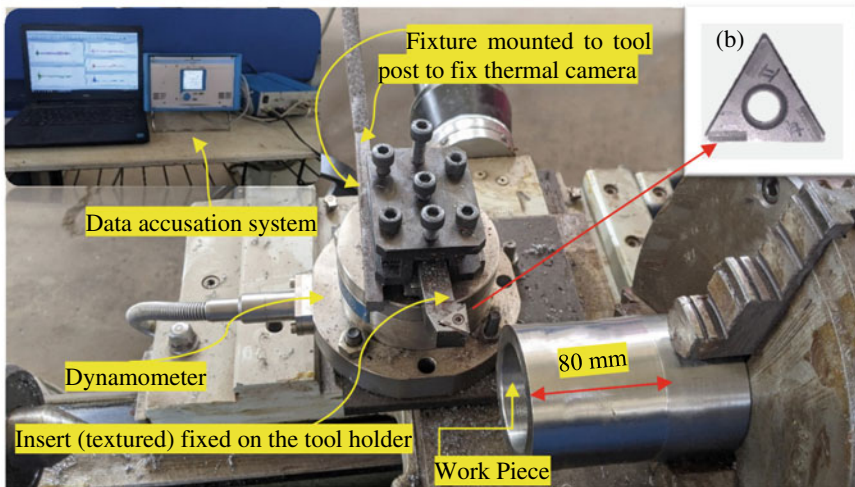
Schematic of machining setup showing, a Tool dynamometer arrangement, b actual photograph of the insert with textures engraved
